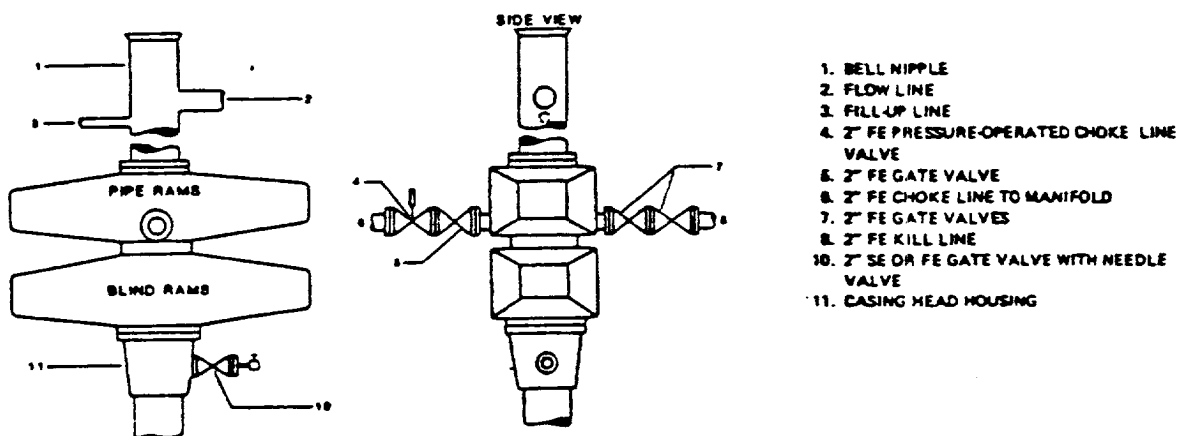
Standard Hydraulic Blowout Preventer Assembly
